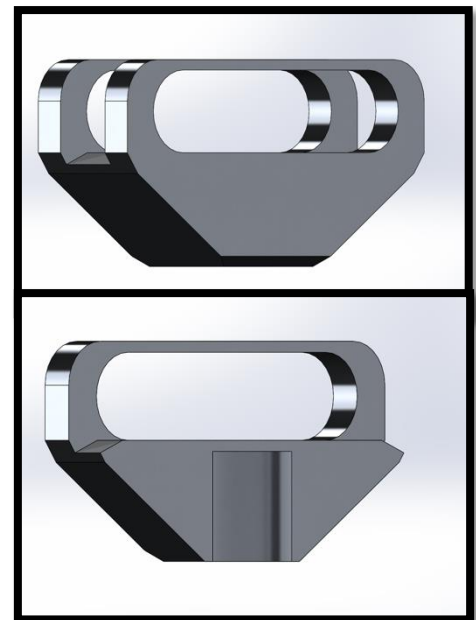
OPTIMIZED PUSHROD HEAD + CROSS SECTION CUT
